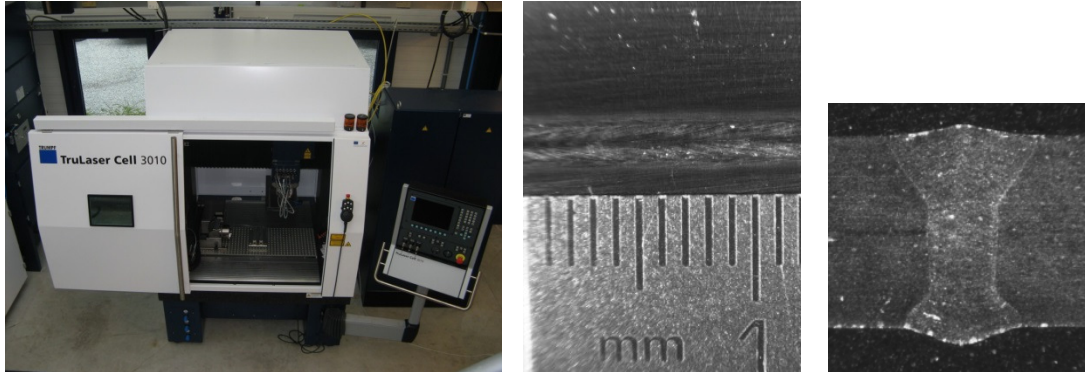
Laser welding cabin (left) and typical weldment (right) (Source: CEWAC)
